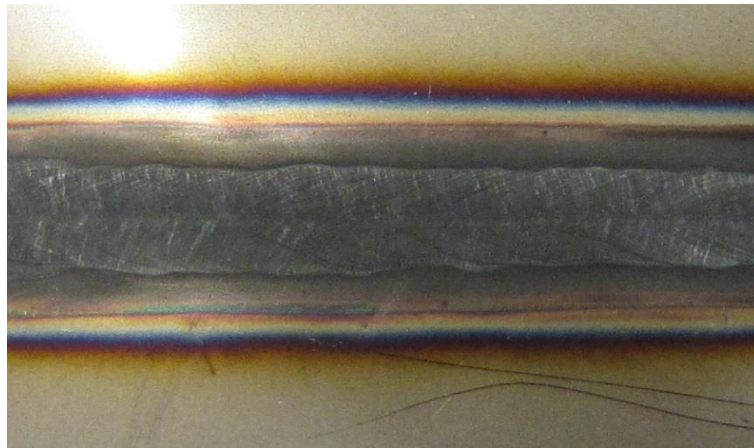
A typical weld surface in one of the sheet metal test pieces.
